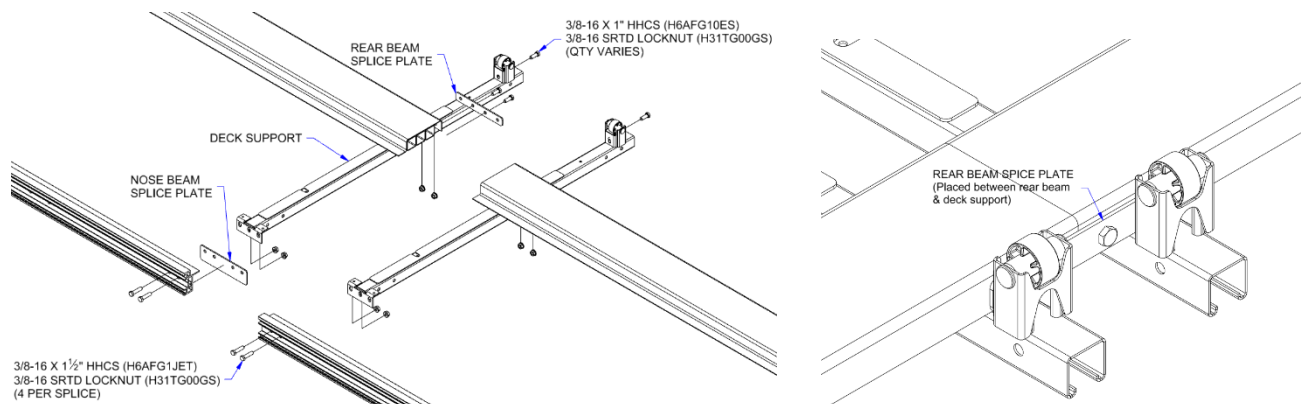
Low Rise Section Splice (Rear beam splice plate between rear beam & deck supports)
